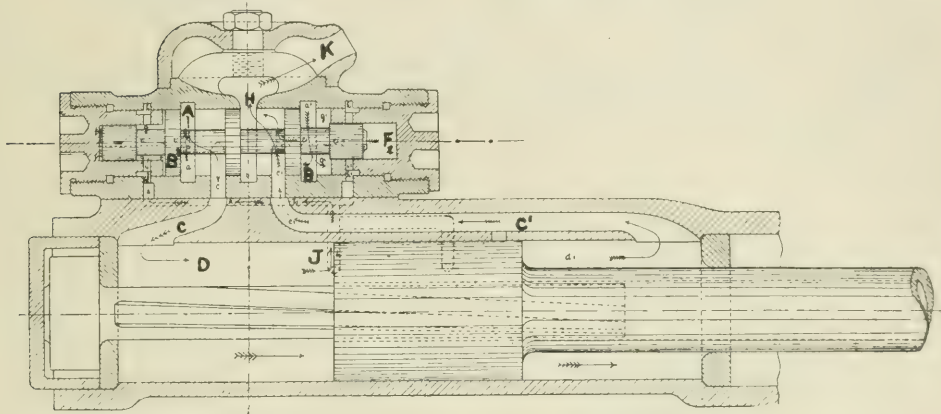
THE SISKOL DRILL, SHOWING THE SPOOL VALVE.
